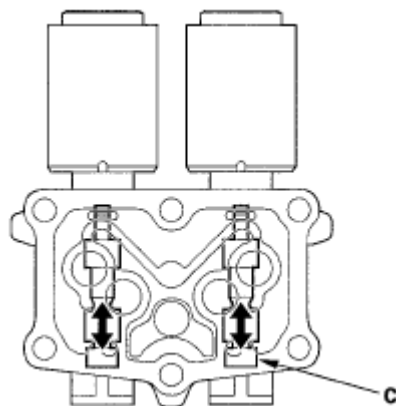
Checking A/T Clutch Pressure Control Solenoid Valve C
